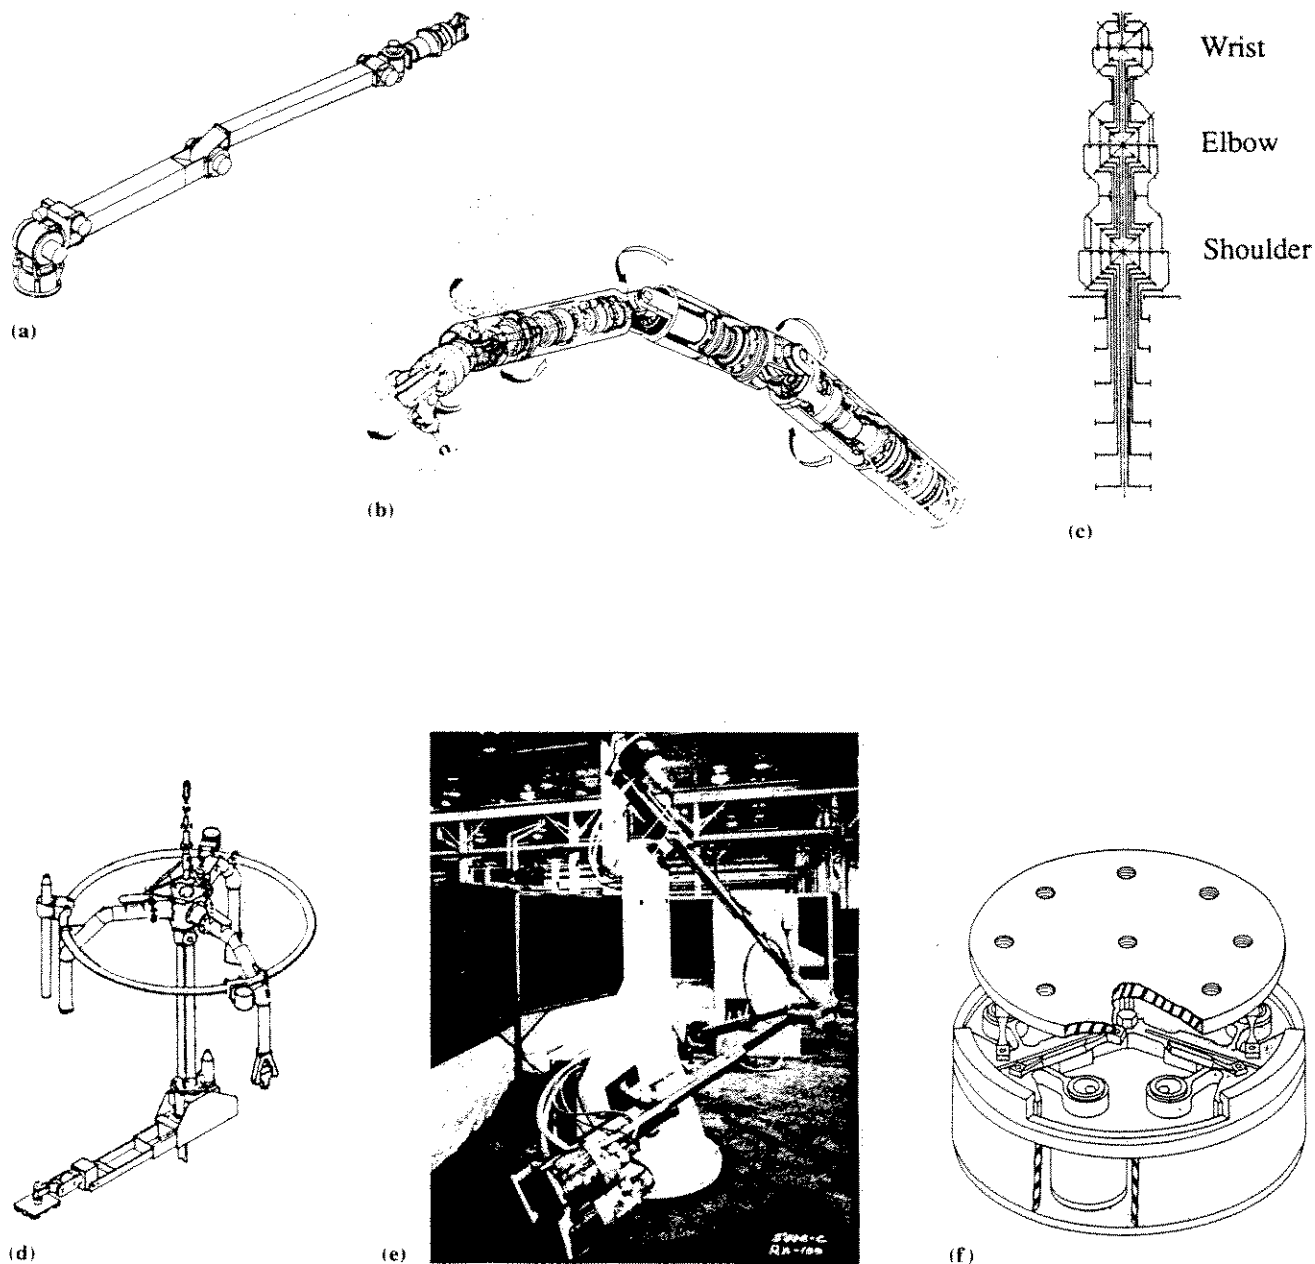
Interesting prototypes (a-f, left to right, top to bottom): Martin Marietta's Proto-Flight Arm; Russian bevel gear drive manipulator; bevel gear-motor modules in manipulator arm; 11-DOF reactor vessel inspection robot by Westinghouse; Lamb Corp. prototype tripod robot; micromanipulator (based on Stewart platform)
